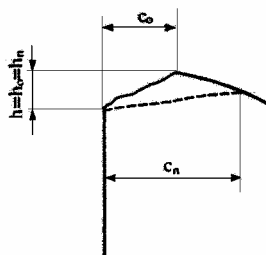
The wear zone with the uncoated and coated hob milling machine
